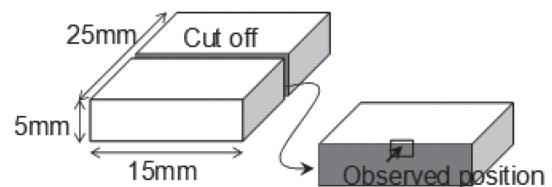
Schematic drawing observed position of optical microscope and EPMA.
